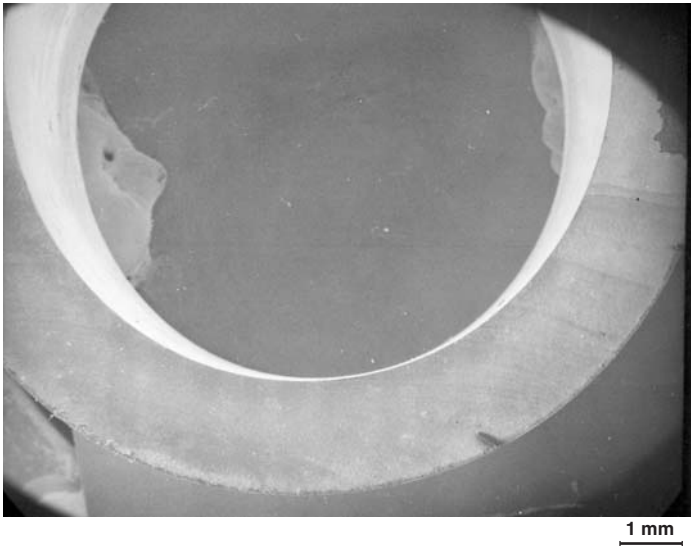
Features resembling beach marks on the fracture surface of the failed piston. SEM fractograph
